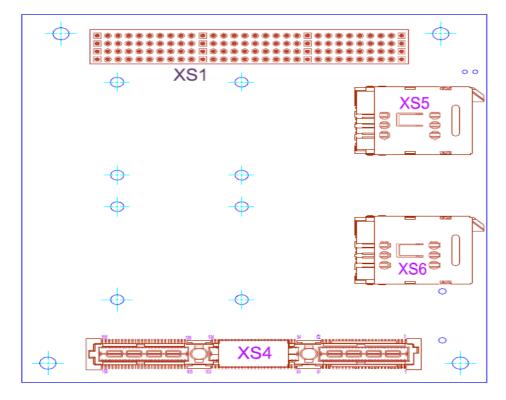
Location of KIC301 connectors on the BOTTOM side
